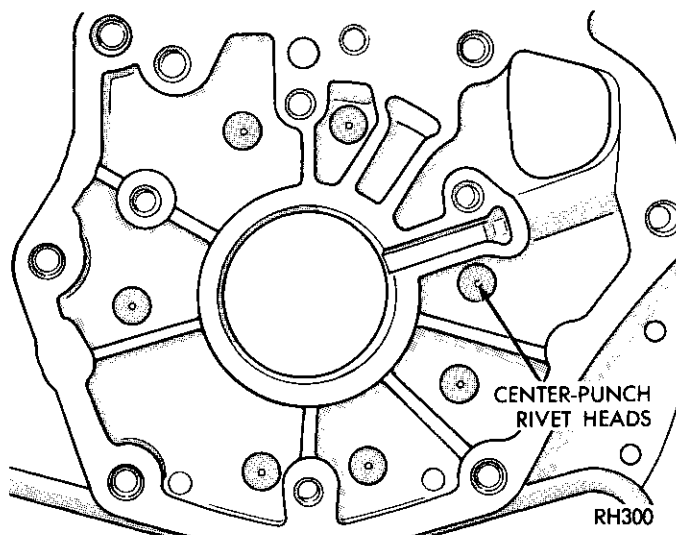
Center Punch Clutch Cam Rivet Heads—999
